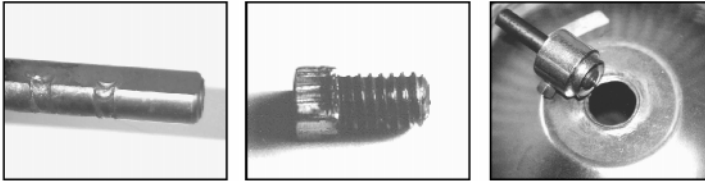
A gouged shaft, a damaged setscrew and wheel.
